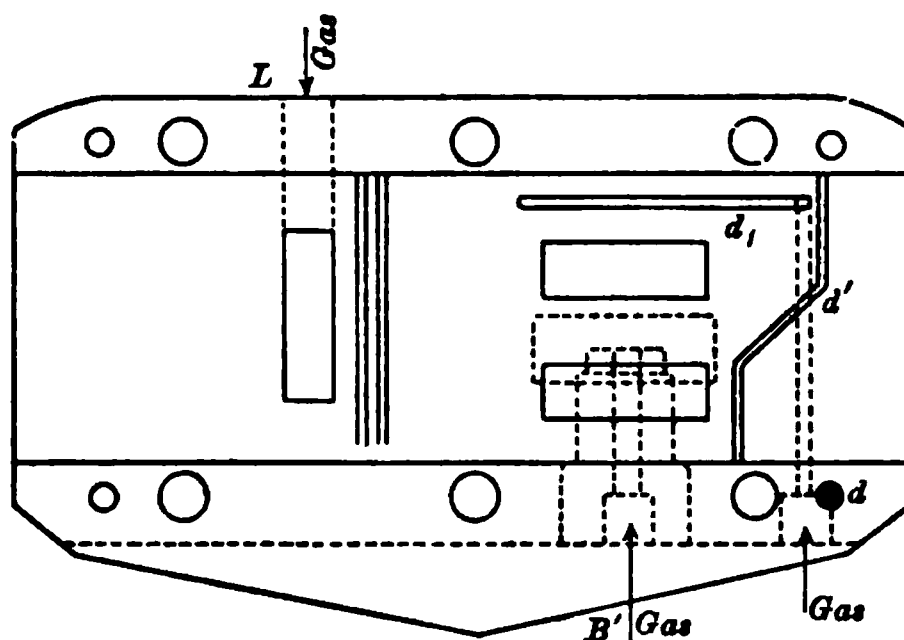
Otto Engine—Vertical View of Slide Cover. 1876.
